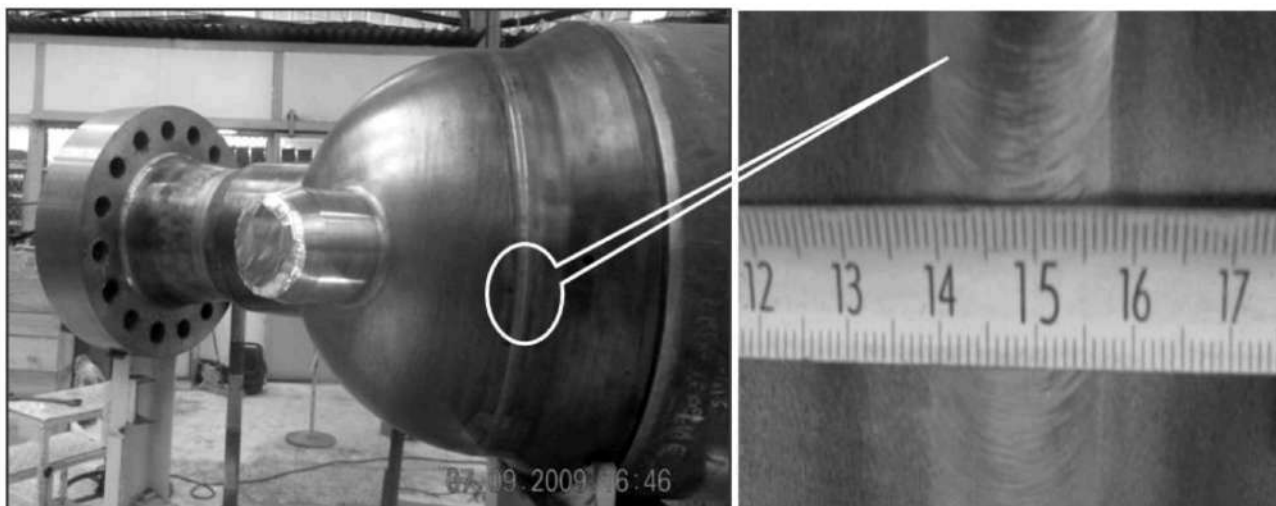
Weld produced using narrow gap hot wire GTAW process for 90mm thick joint of steam generators
